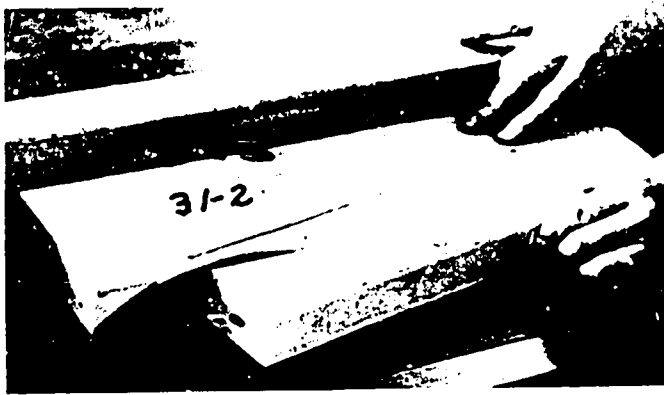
Cutting the Taper on the Circular Saw Using Fixture
